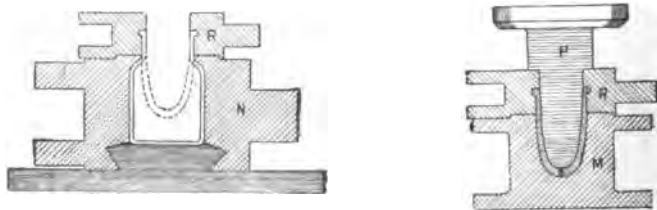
\*—Moulds for Pressing and Blowing a Bottle.
